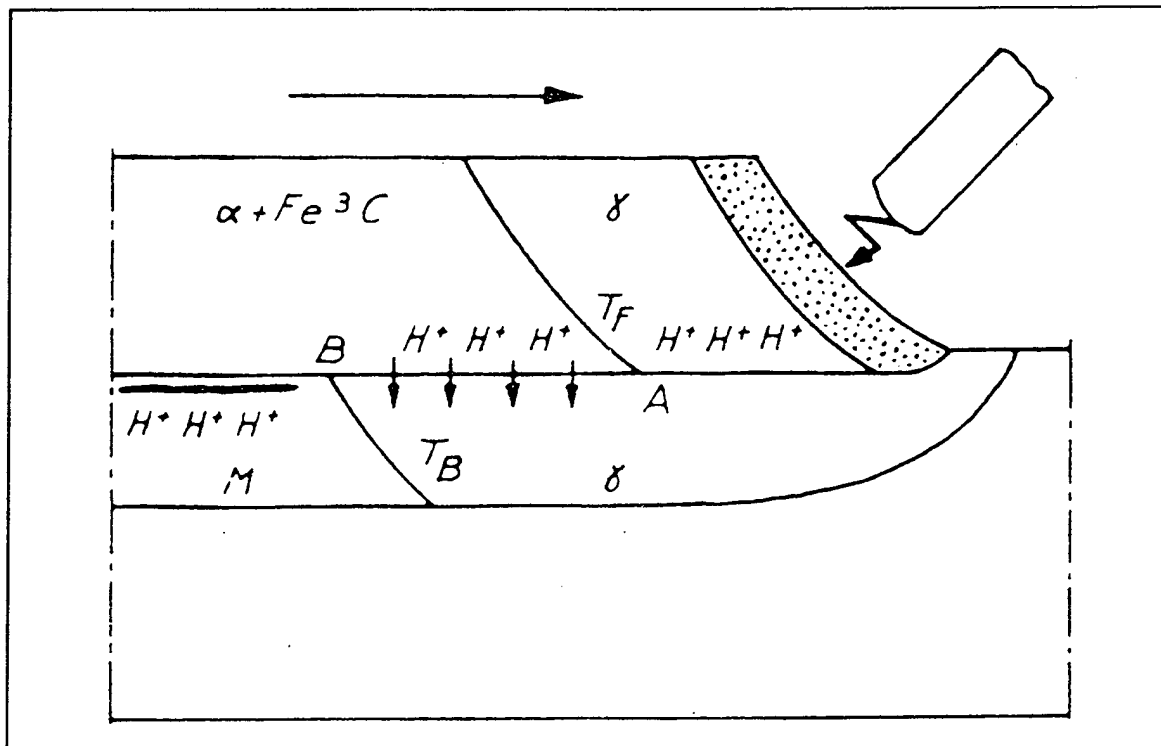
Diffusion of hydrogen from weld metal to HAZ during welding.
